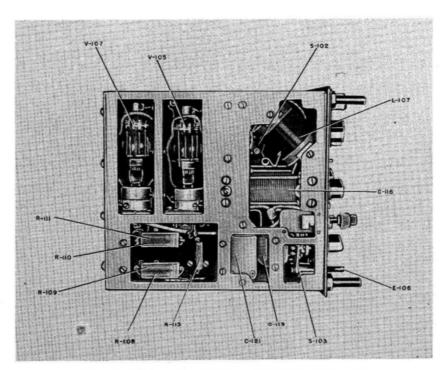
Transmitter Unit — Left Side Open View (older model shown; see note for Fig. 1)
